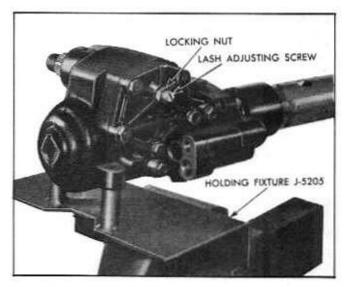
Steering Gear Mounted on Tool J-5205
